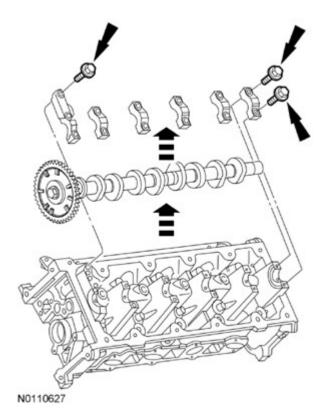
Removing/Installing Bearing Caps And Camshaft Courtesy of FORD MOTOR CO.
